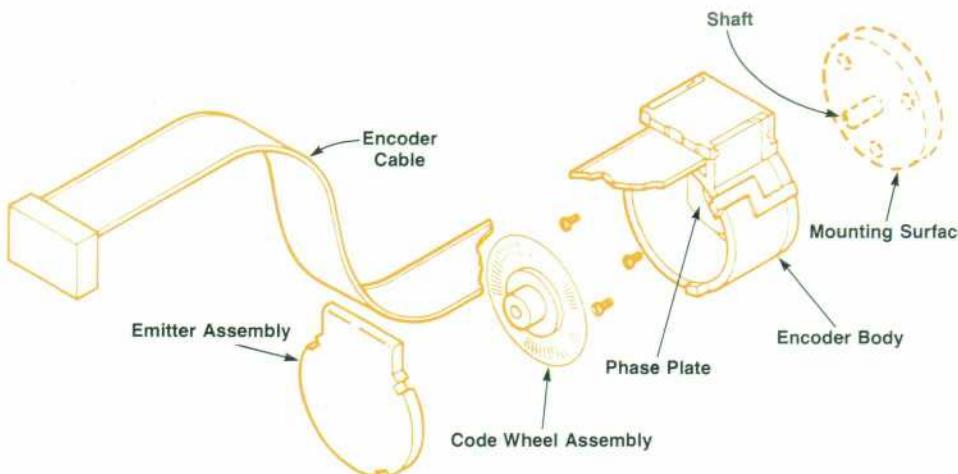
Assembly sequence. The encoder body is mounted to the housing containing the shaft (typically a motor body). The code wheel is slipped on the shaft and secured with epoxy adhesive. The emitter endplate then snaps into place to complete the assembly.
